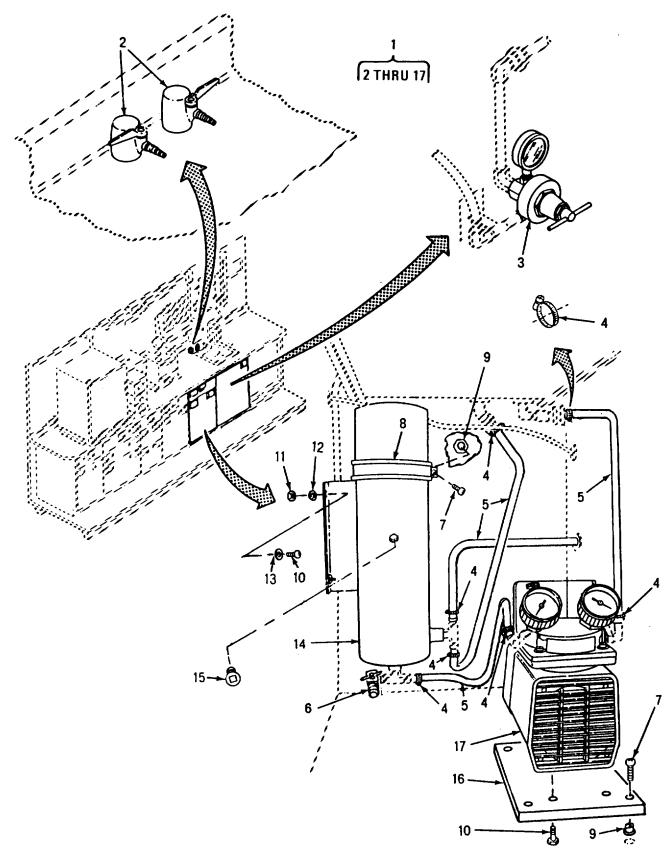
Vacuum - Air Pressure Pump, Air Surge Tank, Stopcock Assembly and Pressure Regulator
